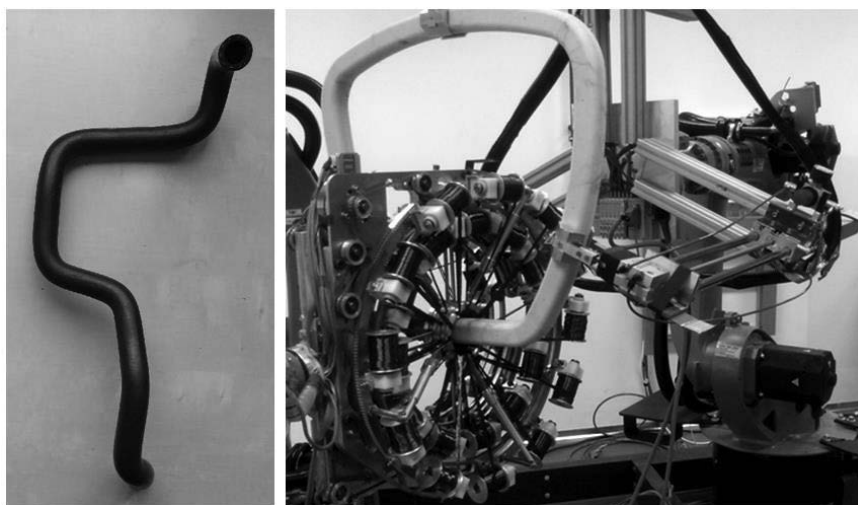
Example of a 3D multi-shaped non-bearing hollow frame with circular cross-section (on the left). Closed non-bearing frame prepared to winding process. Frame is connected to robot working arm and goes through winding head (on the right).
